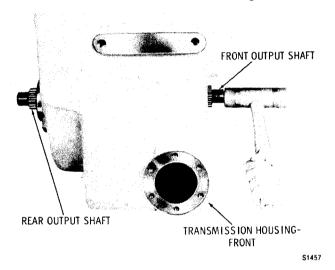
Driving output shaft rearward (-1 models with output disconnect)
